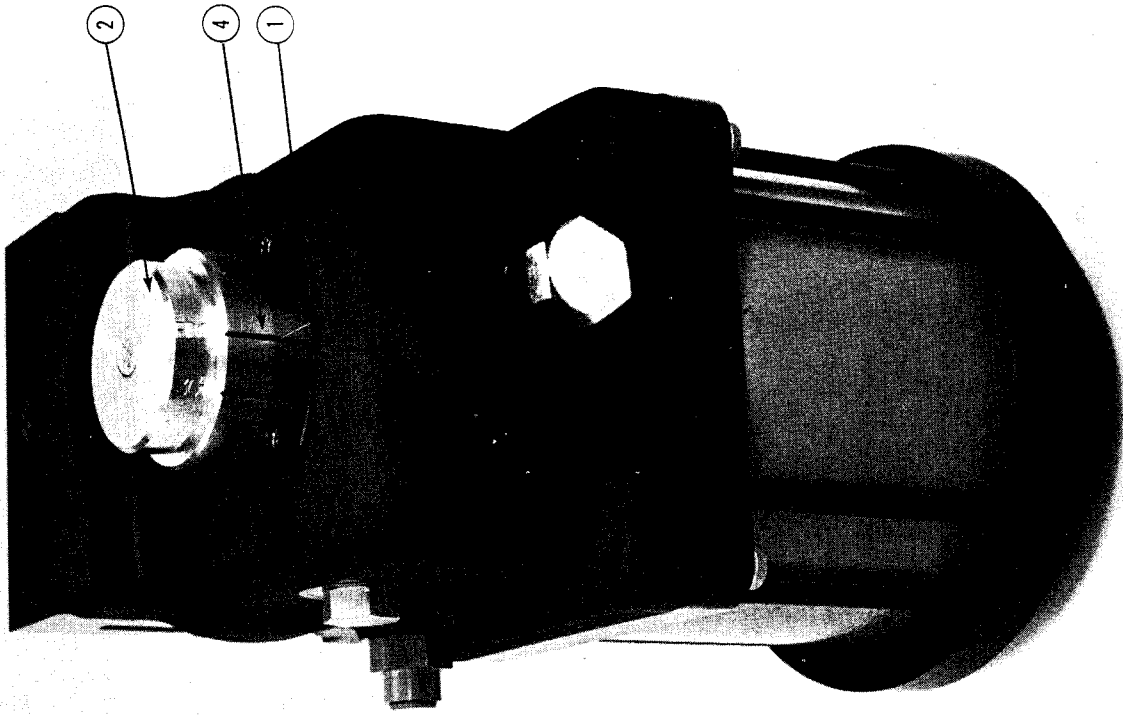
METHOD OF POSITIONING THE DRIVER ON THE DRIVE MOTOR SHAFT
